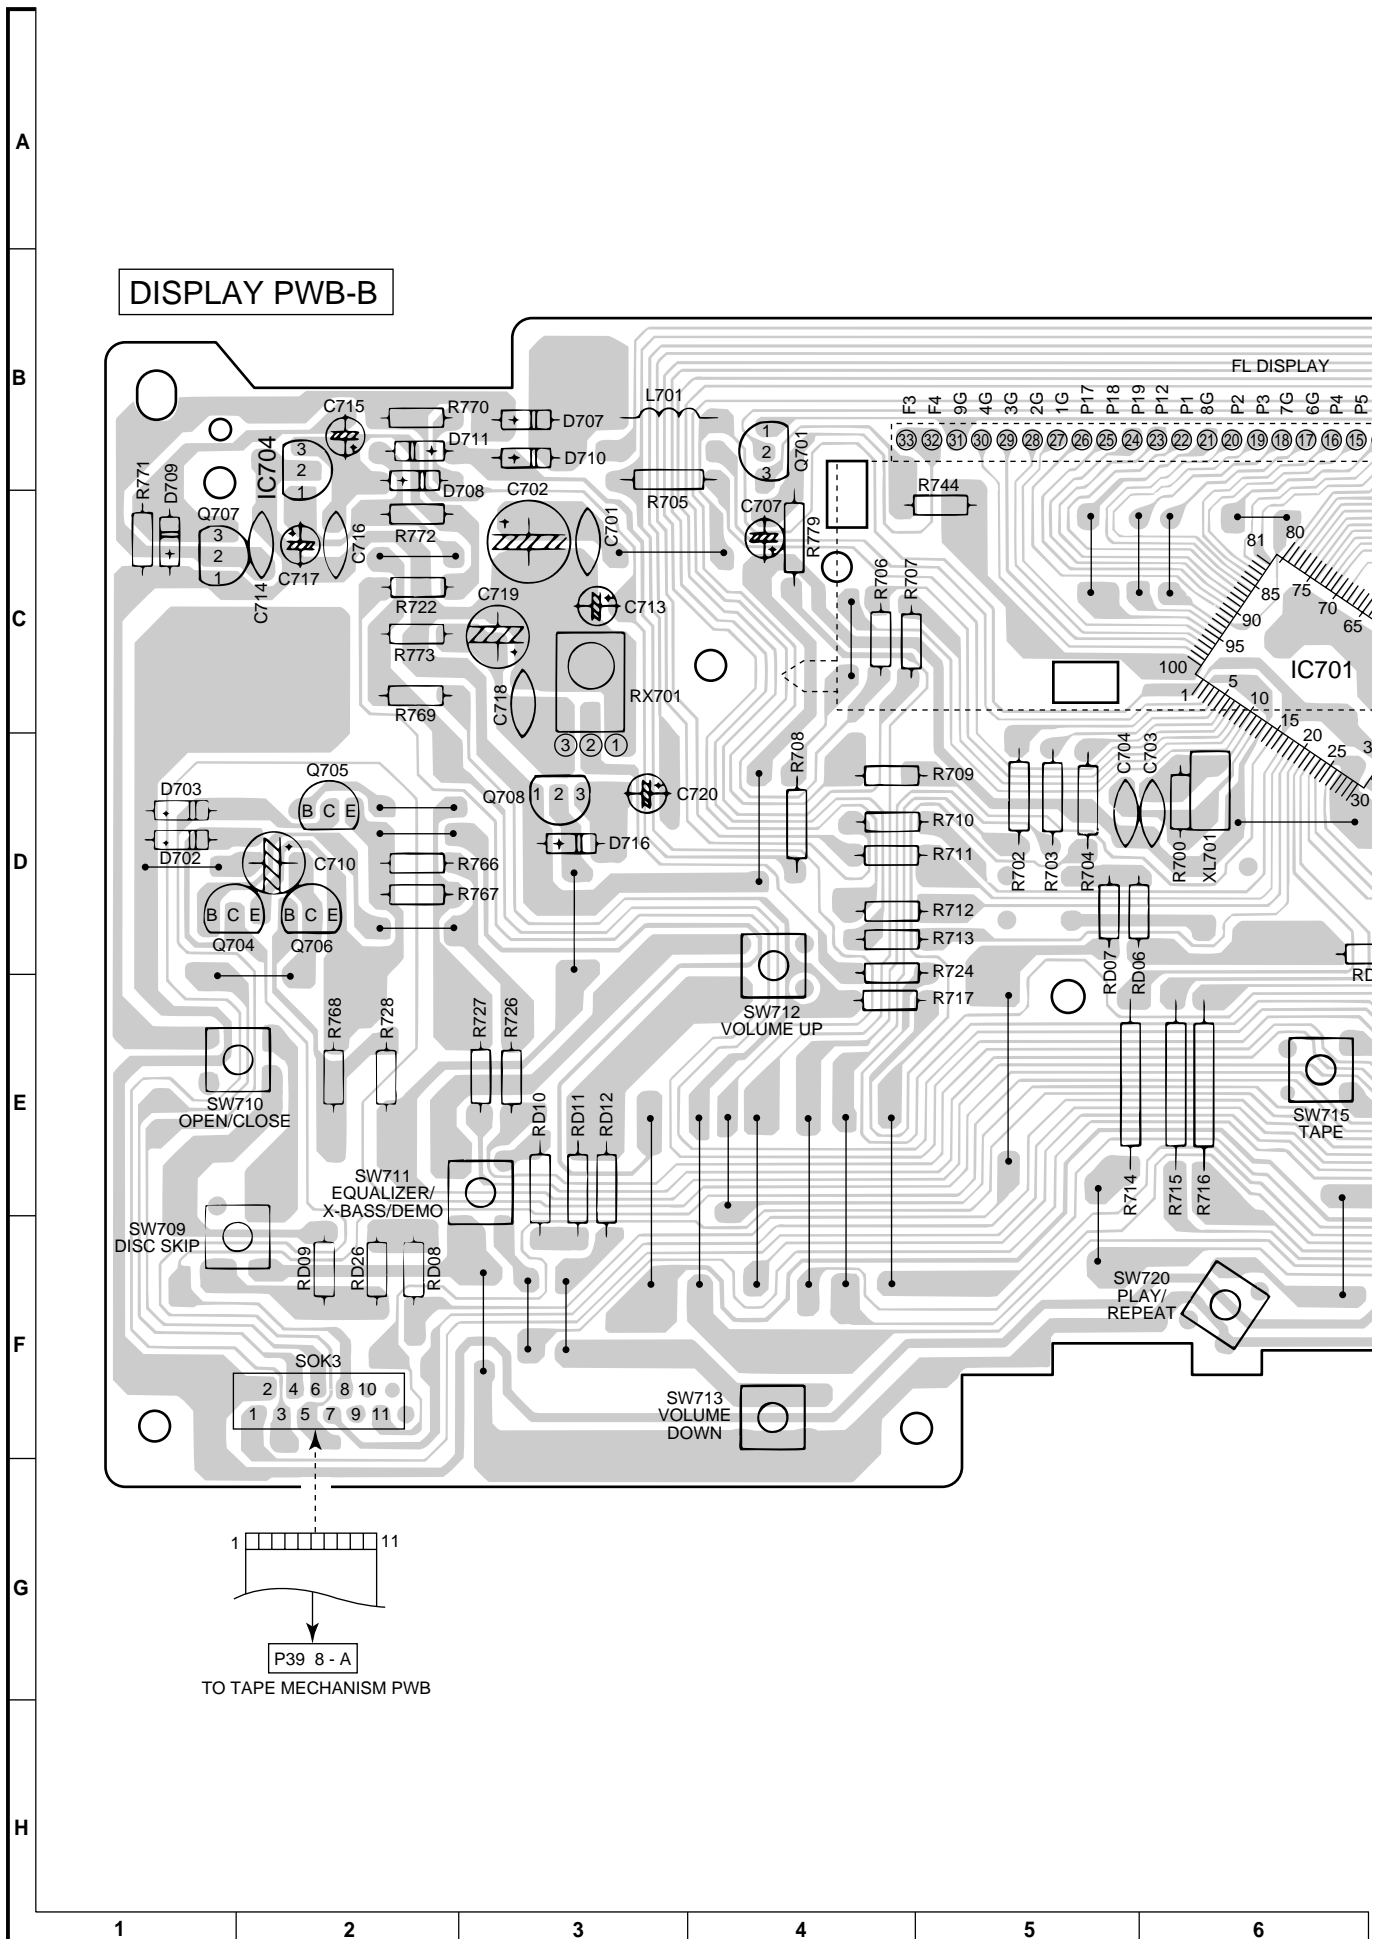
WIRING SIDE OF P.W.BOARD (5/8)
